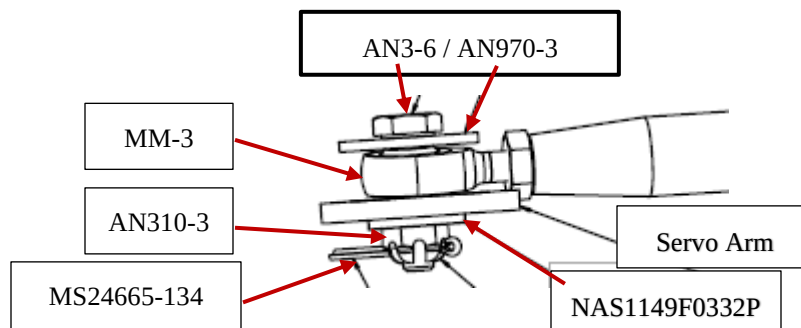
ROLL SERVO ARM INSTALLATION
